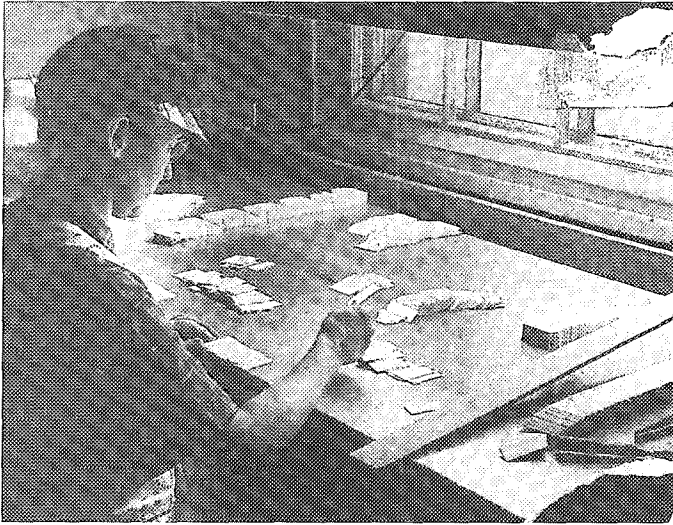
Evelyn Berry matching key heads at Wood & Brooks, 1930s, assisted by northern daylight, ultraviolet tube, and eyeshade. Wood & Brooks Collection.
